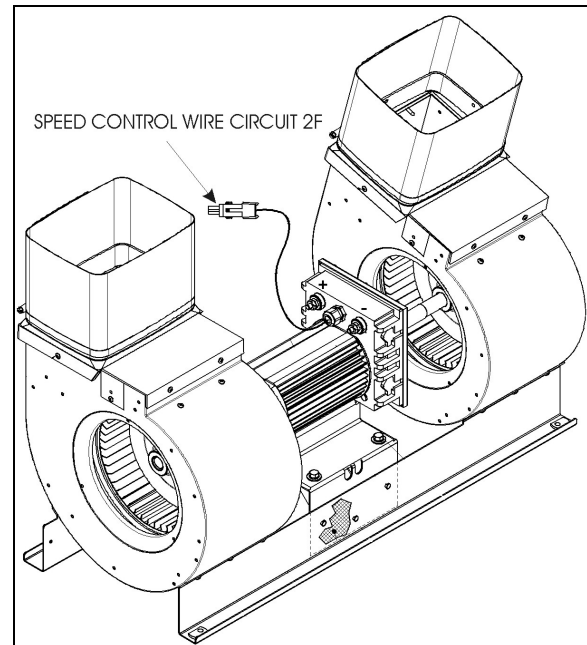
EVAPORATOR MOTOR ASSEMBLY
